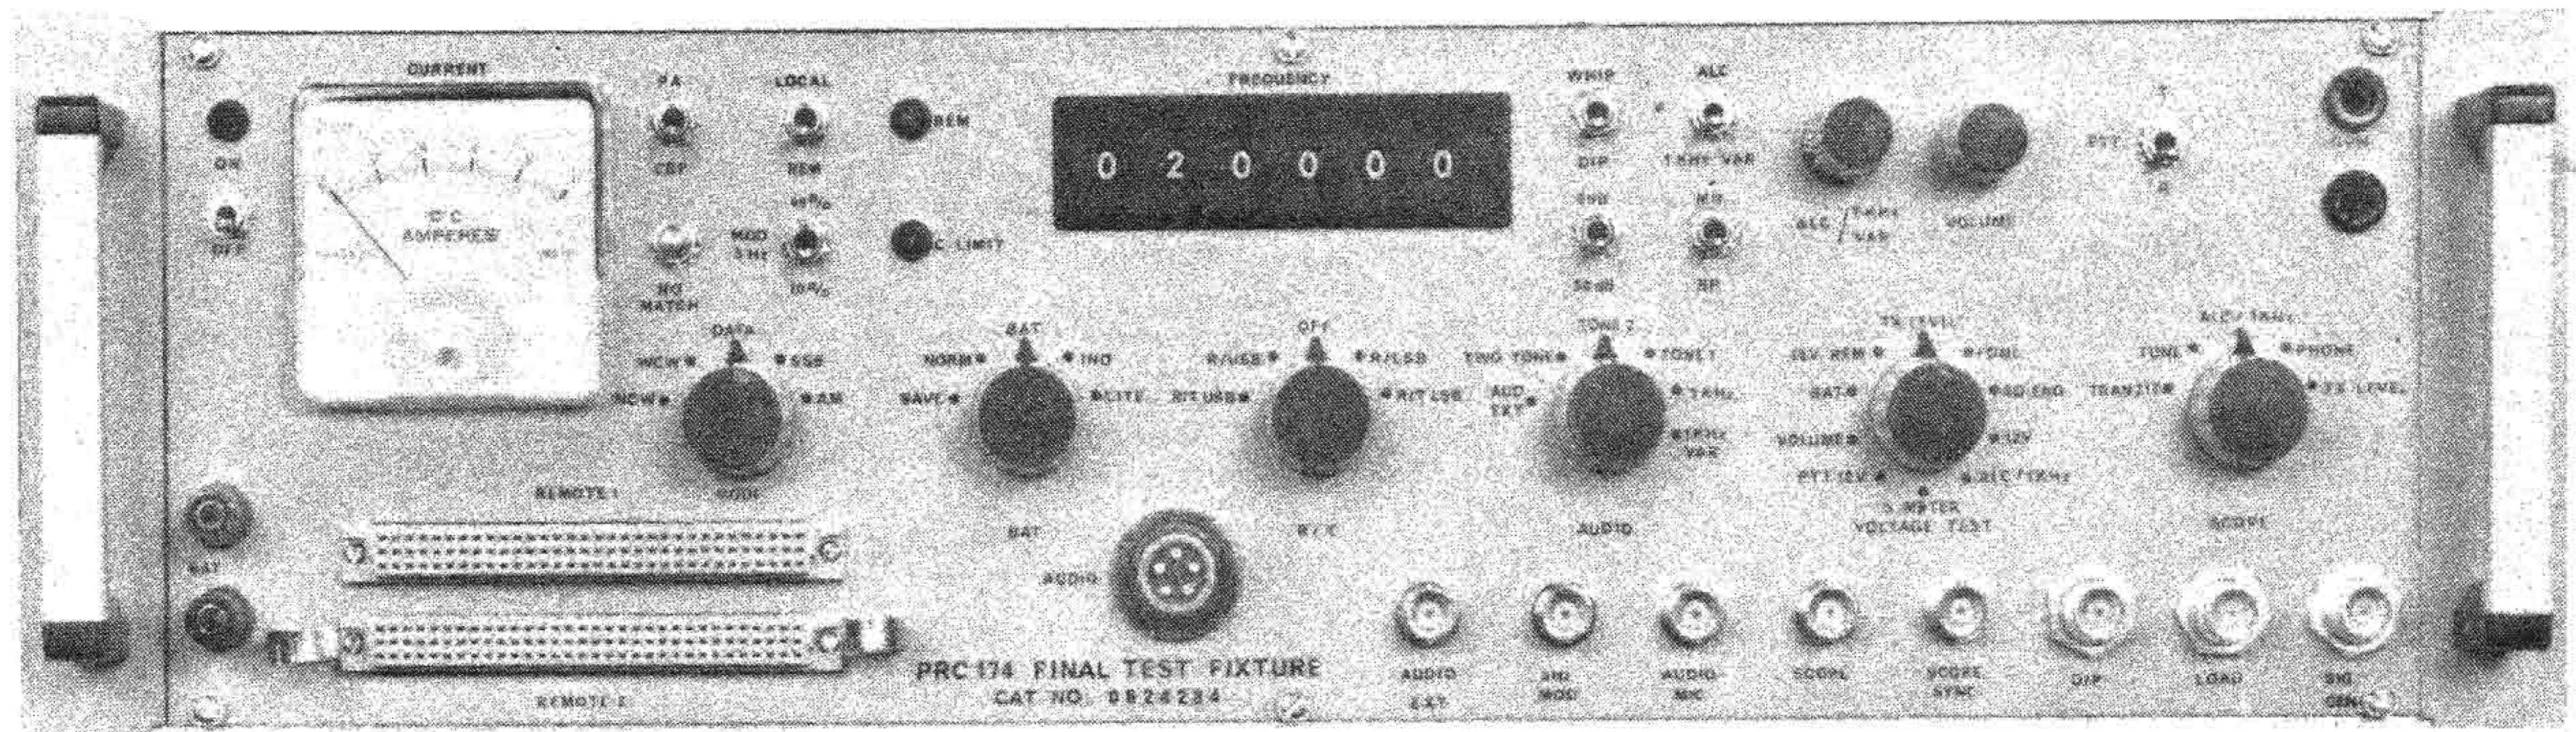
Final Test Fixture, View of the Front Control Panel
